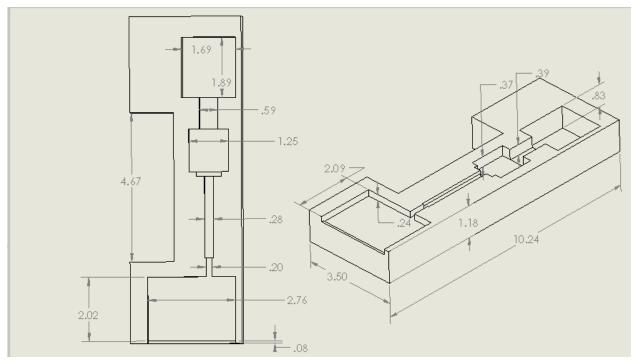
Base Holder SOLIDWORKS Dimensioned Drawing (in)
